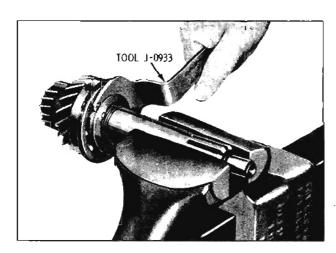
Removing Bearing Retainer Nut and Oil Slinger
